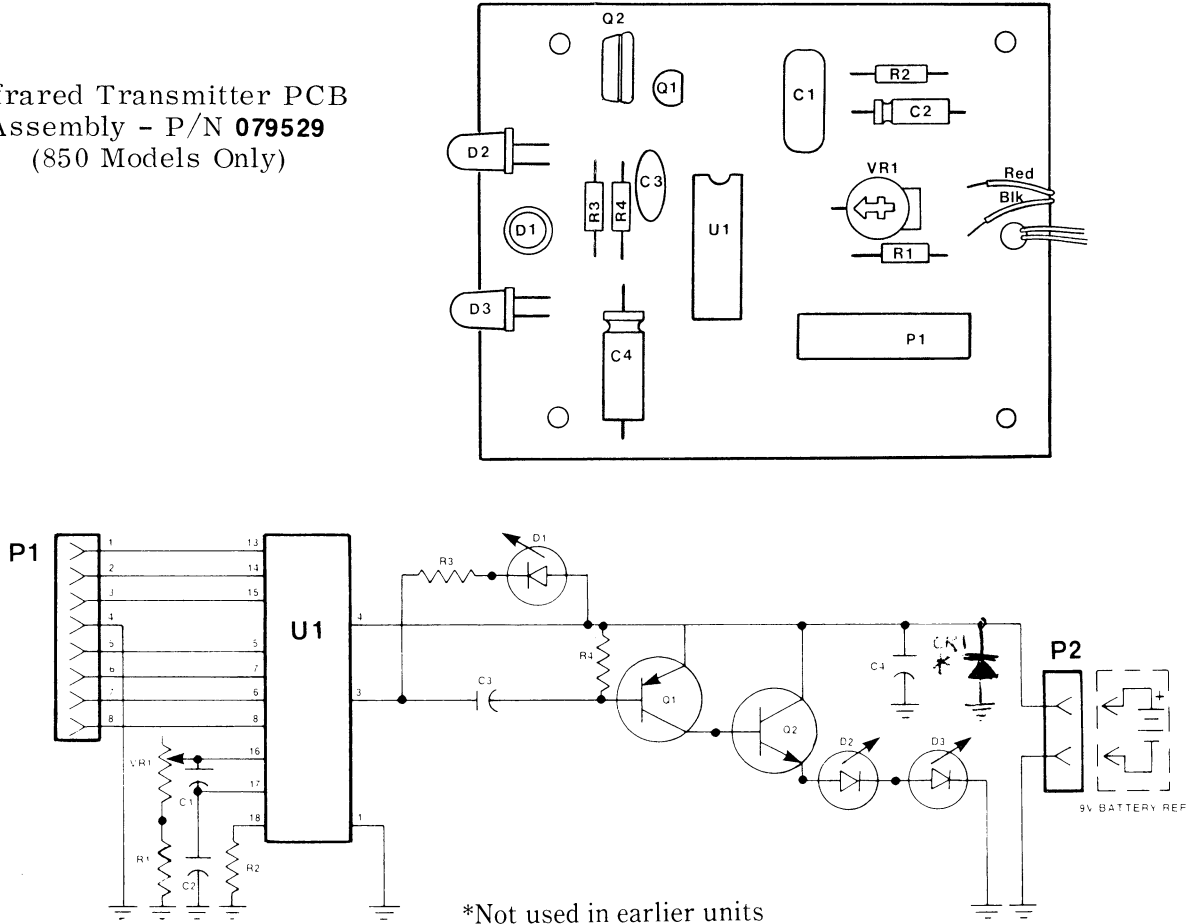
Infrared Transmitter PCB Assembly Schematic Diagram (850 Models Only)
